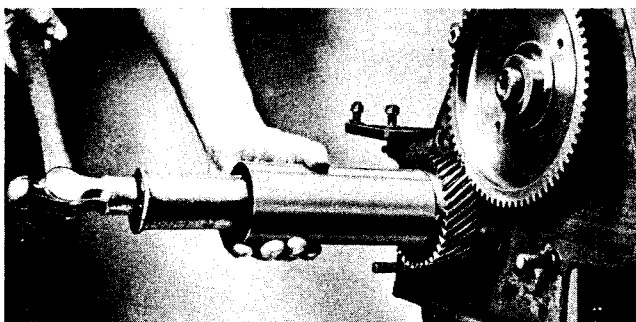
A — FO Rear Bearing Controls Crankshaft End Play
